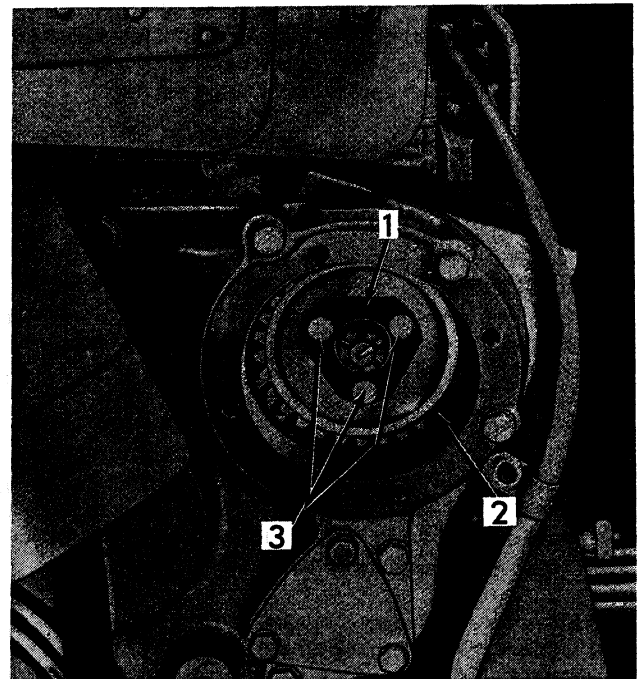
Fuel Injection Pump Drive Gear Installed (Engines Without Fan Drive Pulley) (T-15281)
